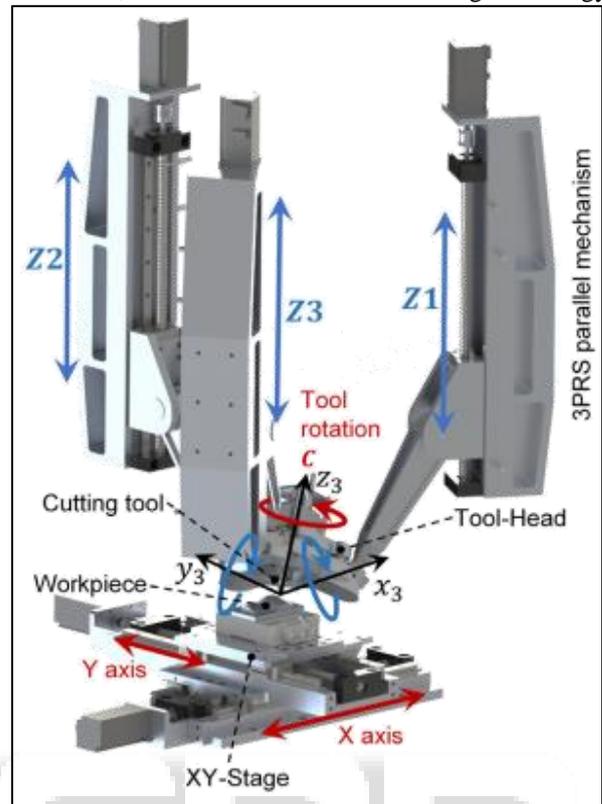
Geometrical Model of the 3PRS+XY+C Hybrid Machine Tool
